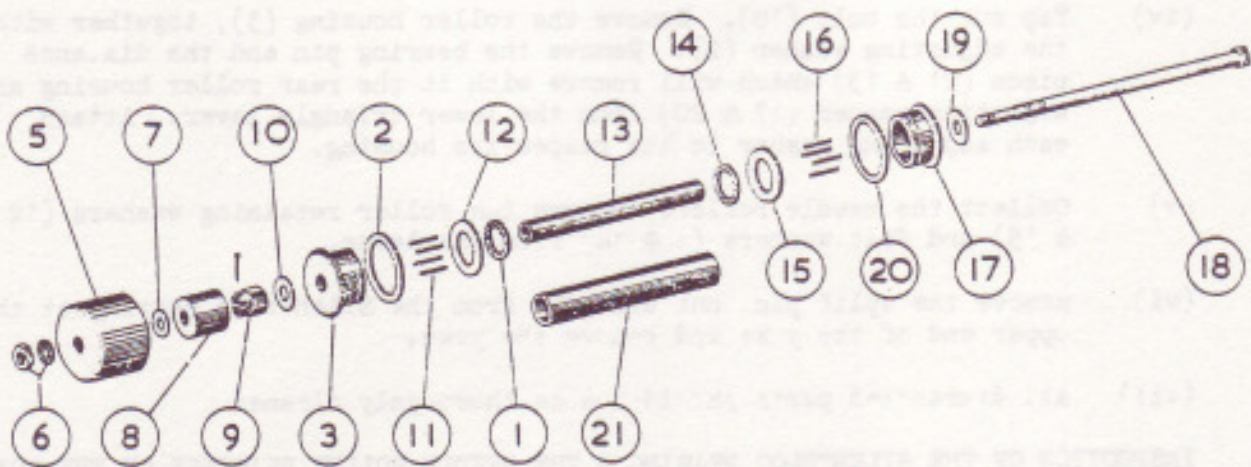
EXPLODED VIEW - YOKE LOWER BEARING.
